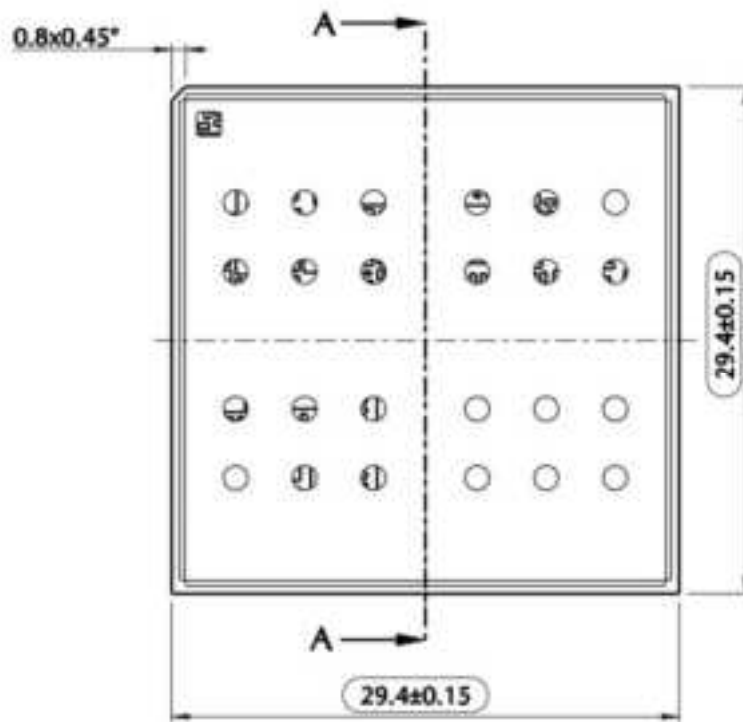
LE910Cx-WWX Mechanical Dimensions (Top view)
